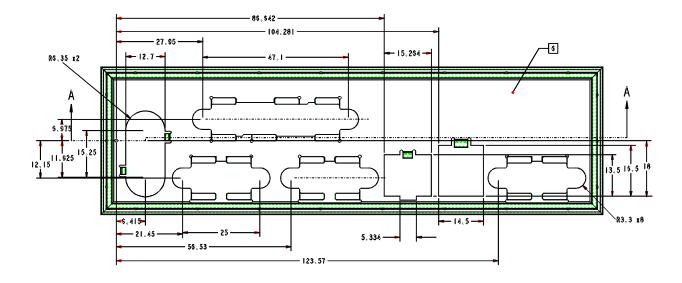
SKA4 I/O Panel Connector Location Dimensions
